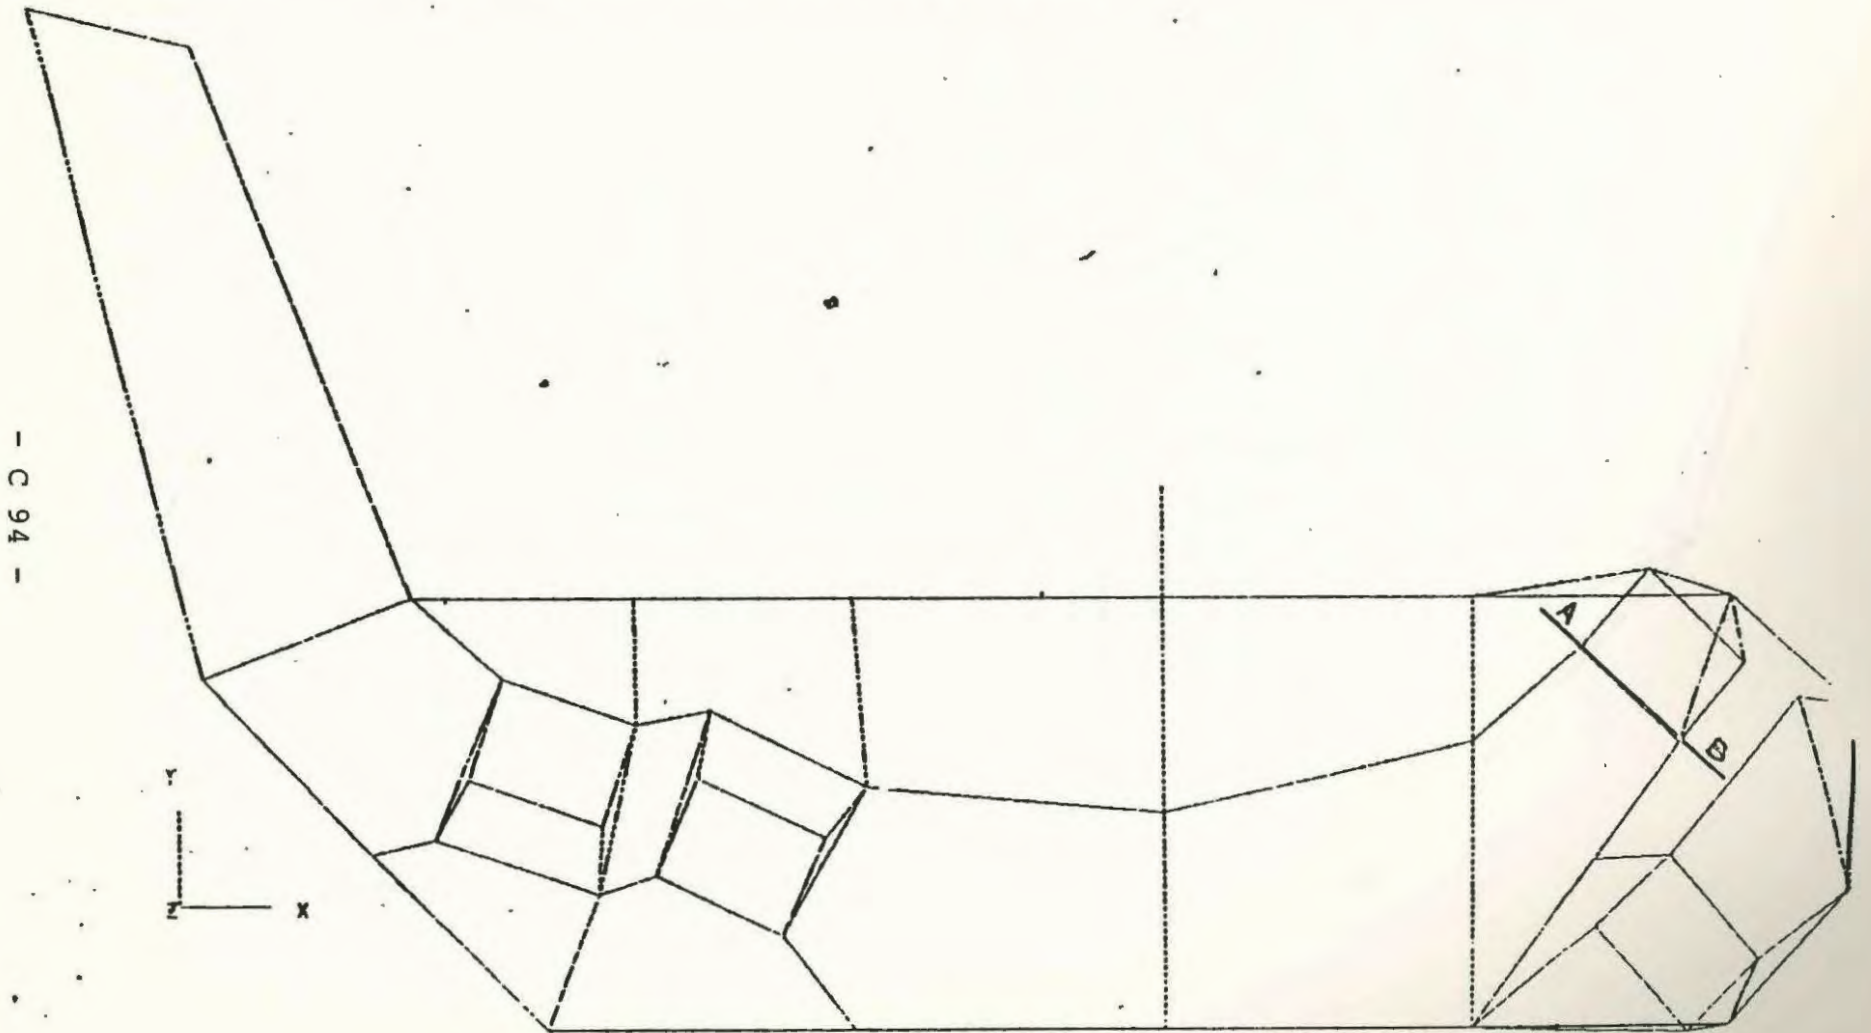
REVISED JOURNAL HOUSING - NON-STEERING LINK SIDE
